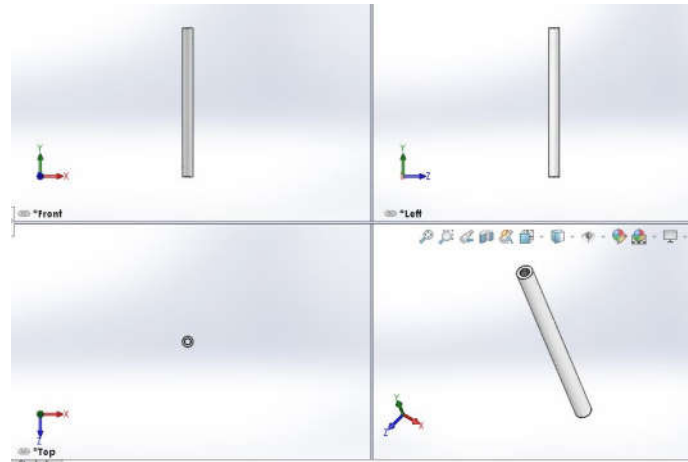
Motor Revolute Joint Male Coupler (PVC Rigid)
